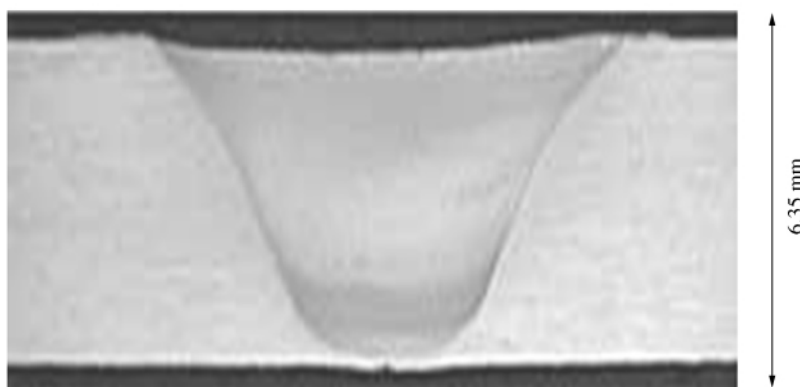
The section of friction stir welding for the Ti-6Al-4V alloy
